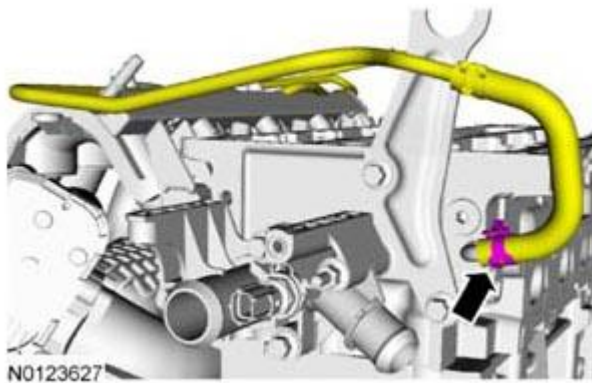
Locating Coolant Return Hose From Cylinder Head
